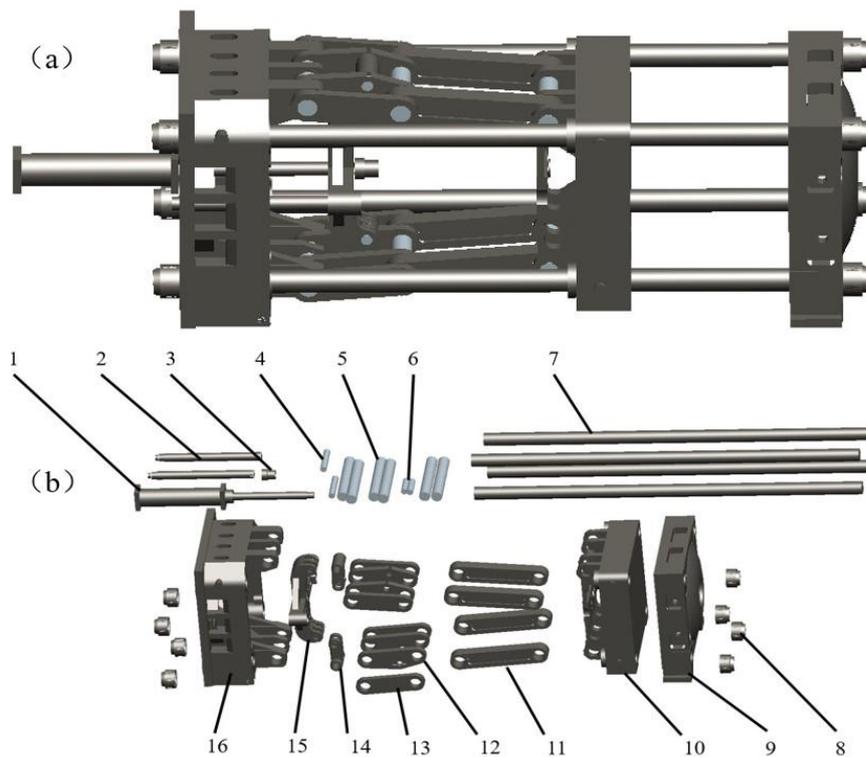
components of the case: (a) the clamping mechanism of an injection molding machine; (b) its explosion modeling in Pro/E
